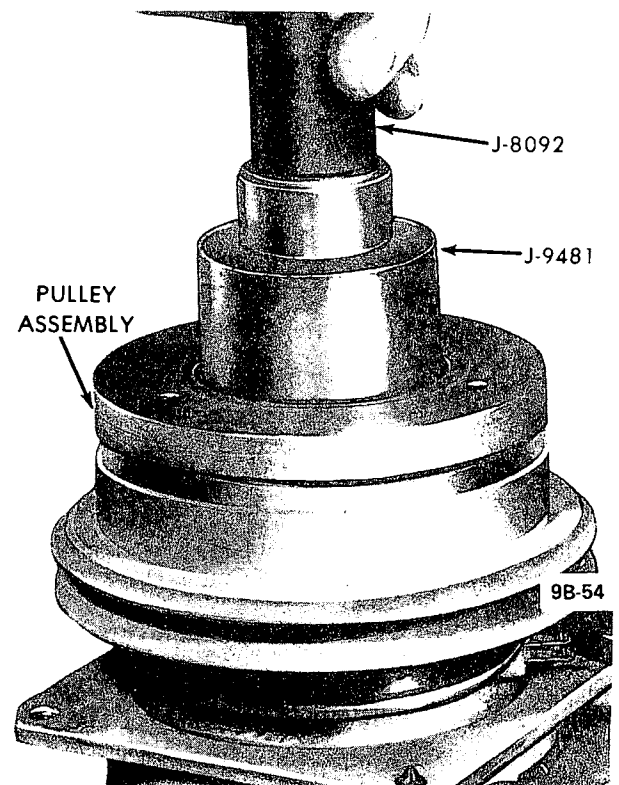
B-78 Installing Pulley Assembly - 6 Cylinder Compressor
